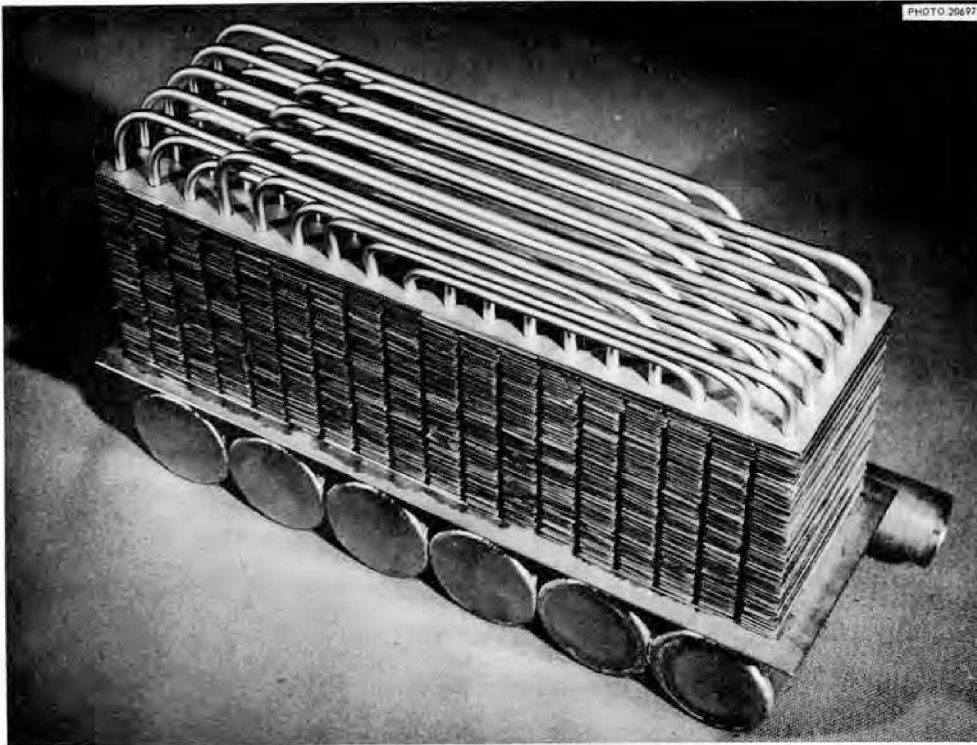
Sodium-to-Air Radiator with Stainless Steel Fins Fabricated by the Combination Welding and Brazing Technique.
